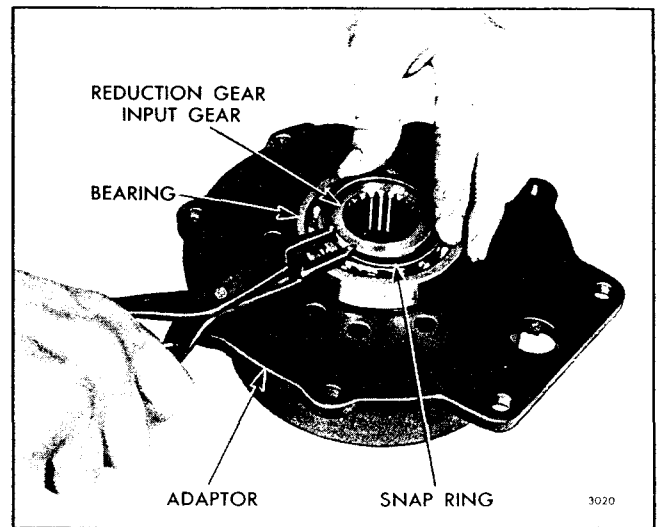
Removing or Installing Reduction Gear Input Gear Bearing Snap Ring (1.5:1 Ratio)
